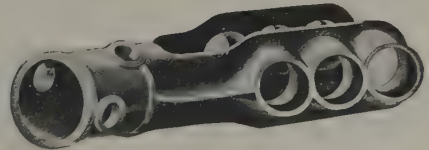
Three-Hole Malleable Iron Brake Jaw.
